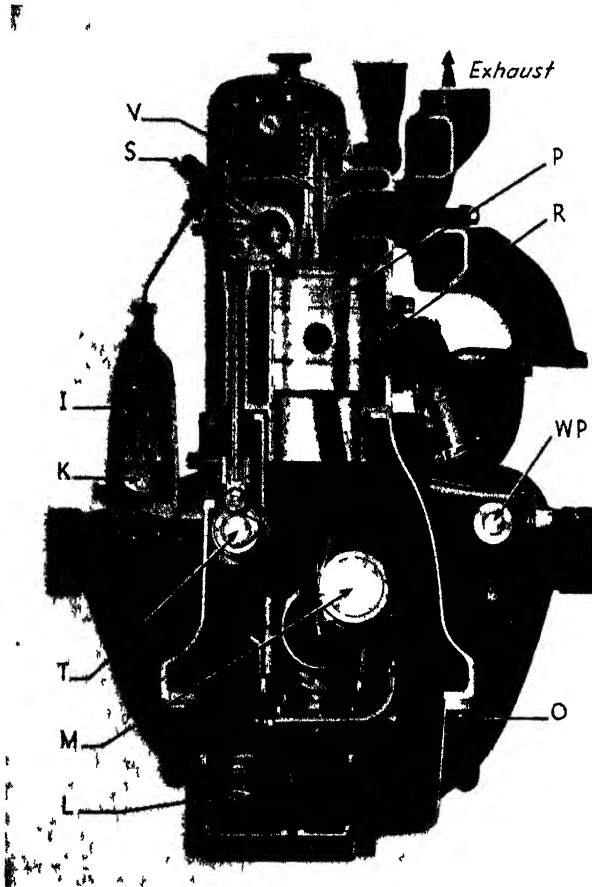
B.—Hercules turbulence-chamber Diesel. *V* = exhaust valve, *S* = fuel spray nozzle, *I* = fuel pump; *K* = fuel pump cam; *T* = camshaft, *M* = crankpin; *L* = lubricating-oil pump, *O* = lubricating-oil piping; *WP* = cooling water pump; *R* = lubricating-oil cooler, *P* = piston.
